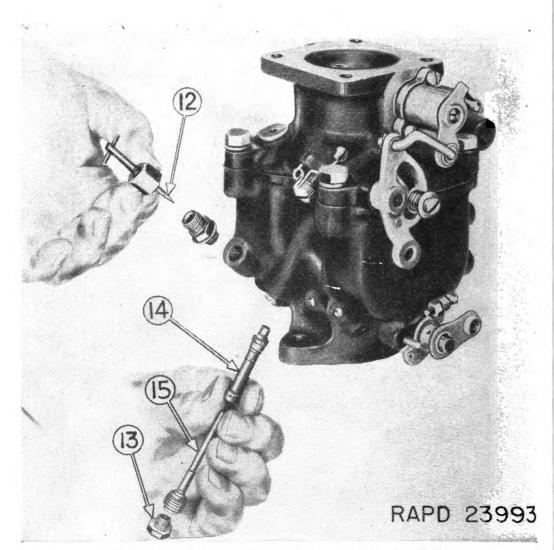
Starting engine carburetor—idle jet and main jet.
